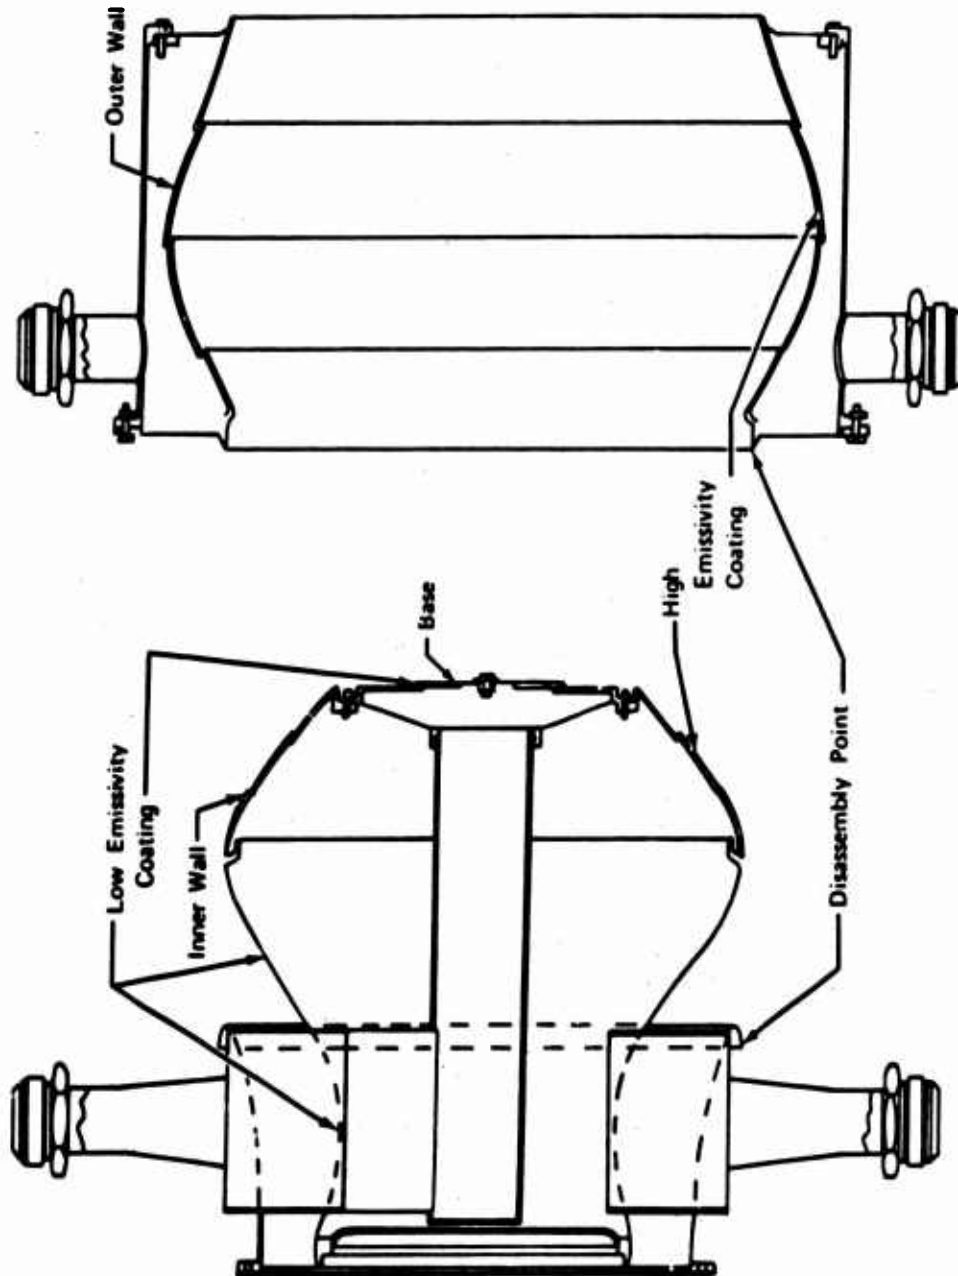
(U) Disassembly and Coating of Demonstrator IR Suppressor
